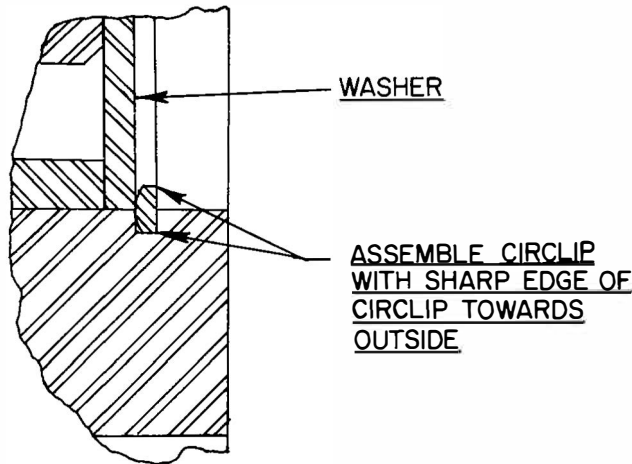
Assembly of Washer and Retaining Ring in Counterweight
